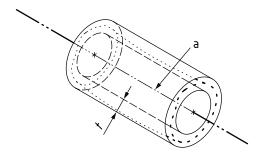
Examples of geometrical tolerancing (Cont.)
